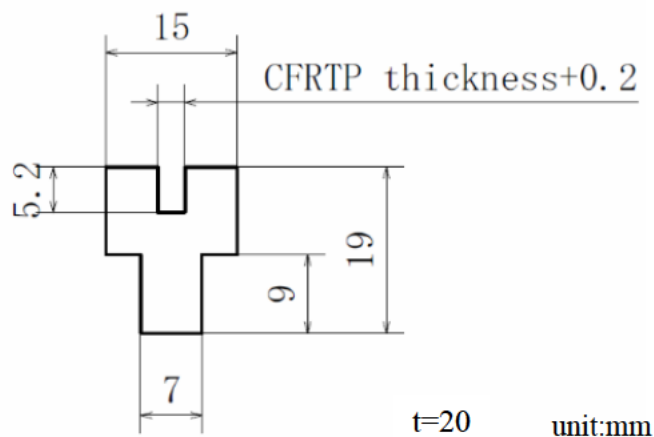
Dimensions of Aluminum piece cut by wire electric discharge machining.
